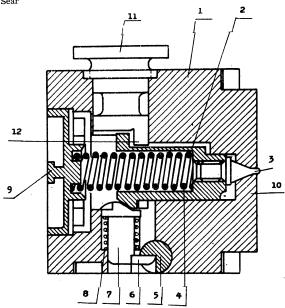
BREECHBLOCK ASSEMBLY SECTION (WITHOUT THE FRONT PLATE)
